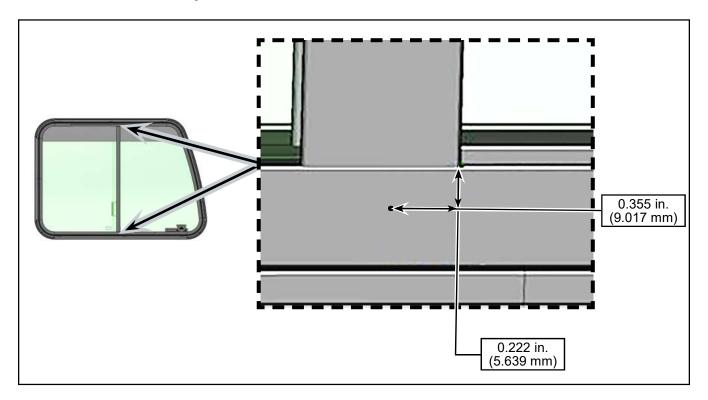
Mark Clearance Hole Locations (Only Bottom One is Shown)
